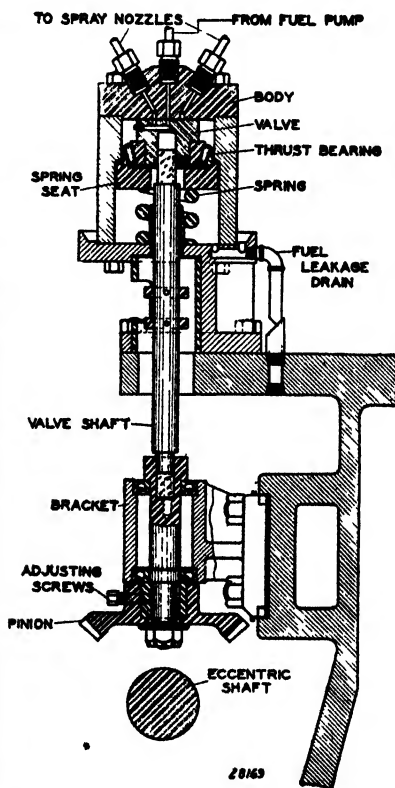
Continuous-rotation distributor of Ingersoll-Rand engine.
